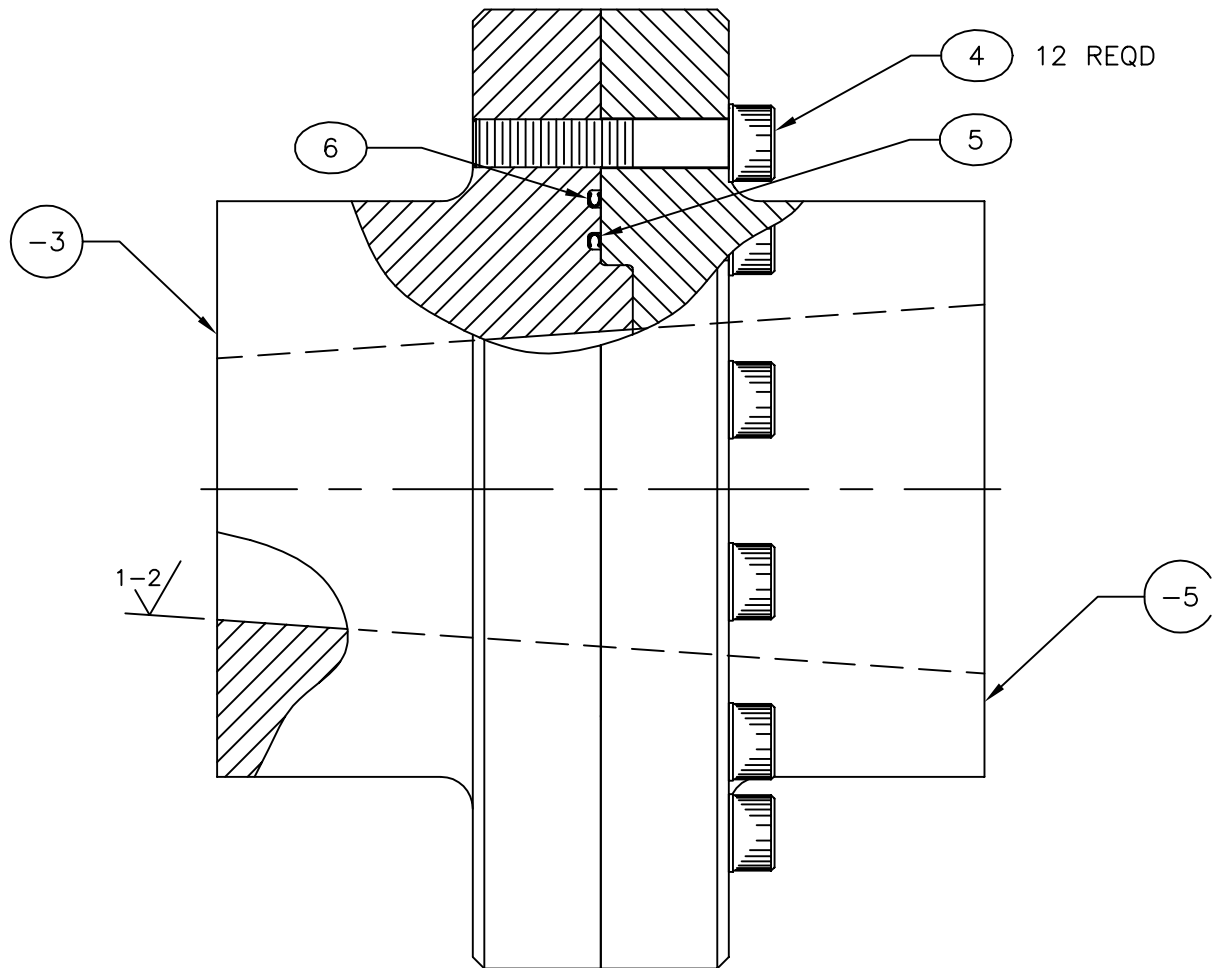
Assembly Drawing for the Nozzle Throat, Half Scale
